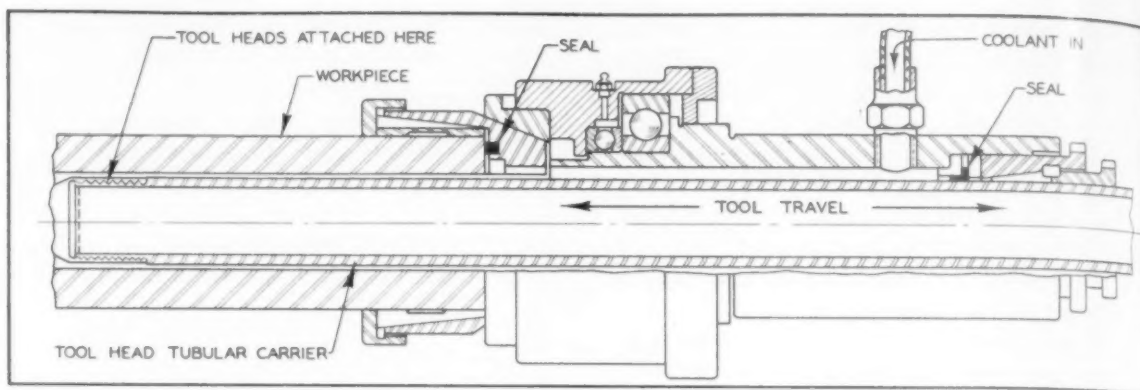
Sketch of the usual arrangement for deep hole shaving tool presents clearly the arrangement of the oil feed apparatus. Note particularly how seal for the coolant system is insured through construction of the unit.
